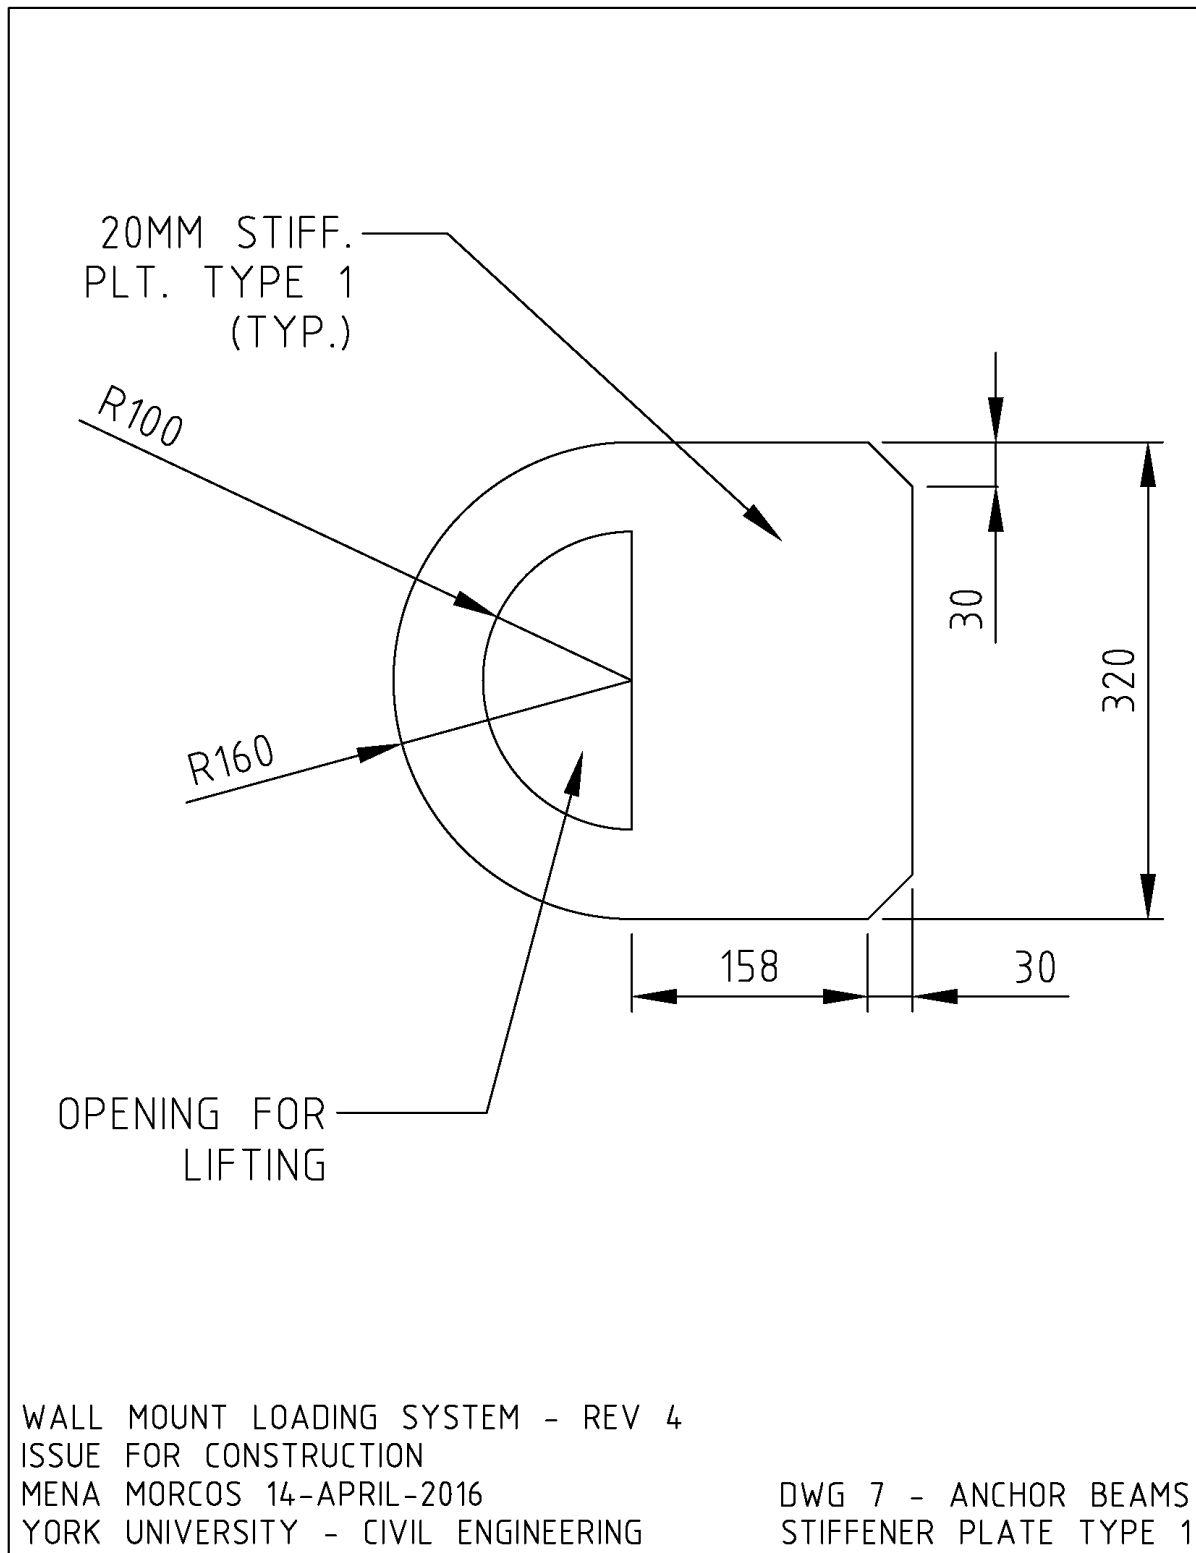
Wall mount loading system design and fabrication drawing – Drawing 7.
